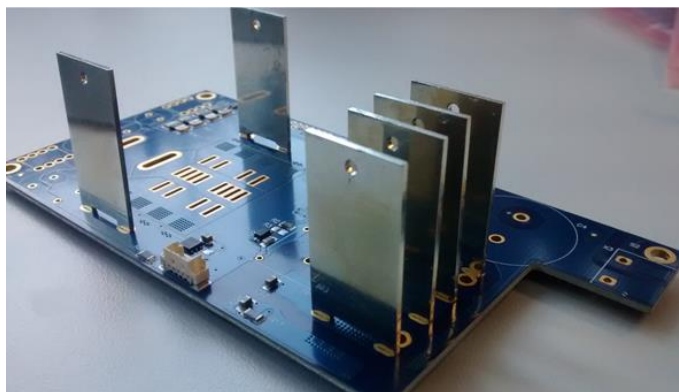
Heat sinks for the HV bridge devices and the LV secondary devices in a partially assembled 1400 W PSFB converter board.
